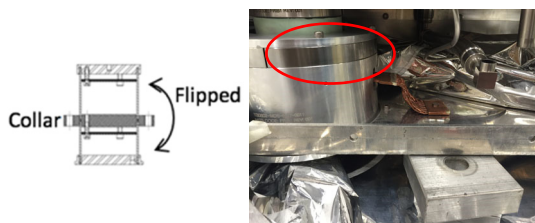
(Left) G10 posts assembled incorrectly, (Right) Inserted spacer to lower the thermal shield.
